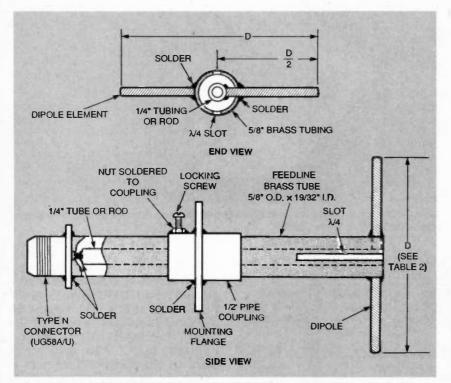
TWO VIEWS OF THE DIPOLE AND FEEDLINE construction details. In the end view drawing note that the right dipole element connects to the inner and outer tubes and shorts them together. The left dipole element connects just to the outside tube. The ends of both dipole elements are equi-distant from the center of the inner tube.
